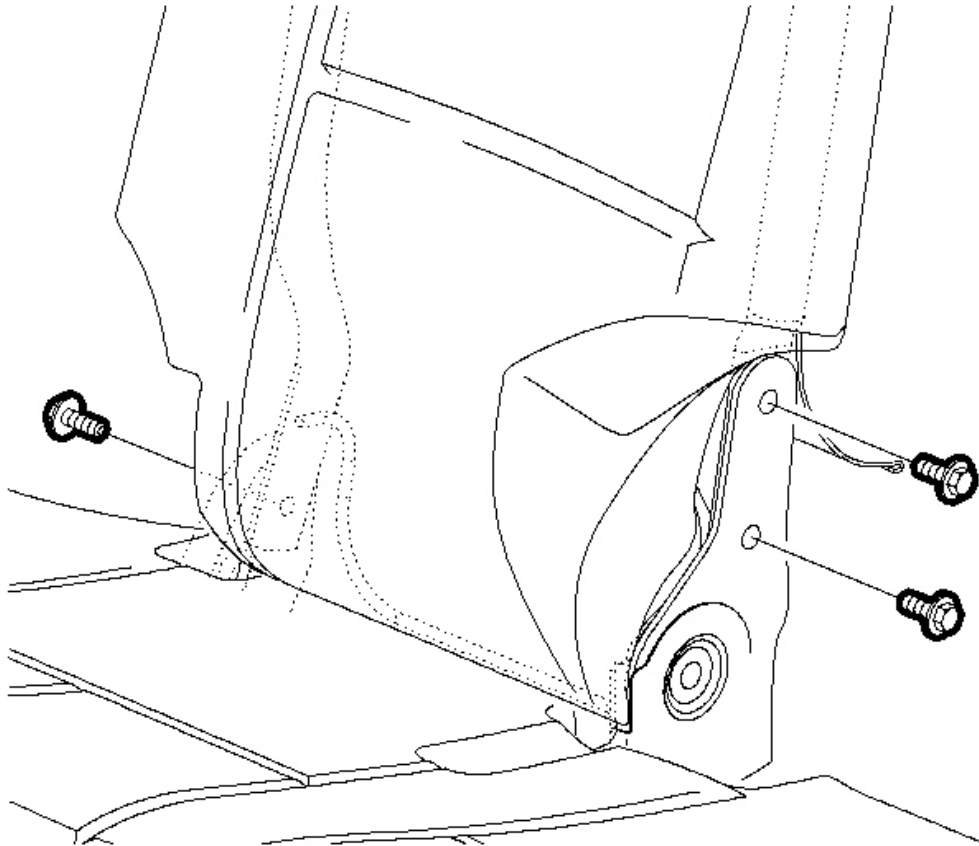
Removing/Installing Inboard Seat Back Bolts
